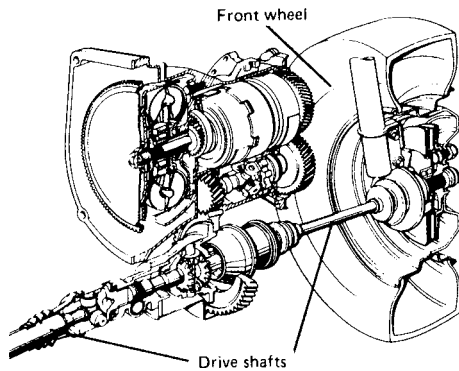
Automatic transaxle used on a front-wheel-drive car. (Chrysler Corp.)
